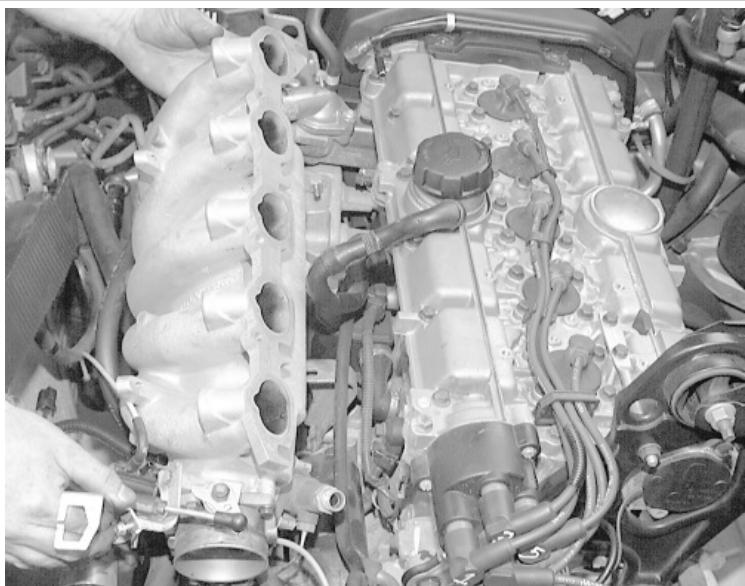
and carefully lift the intake manifold from the cylinder head
